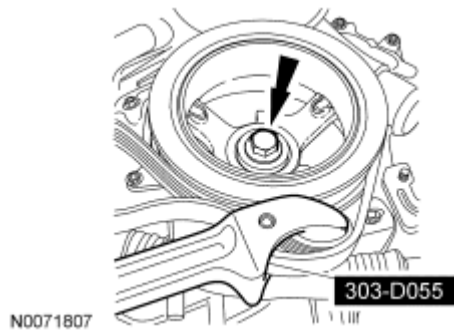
Removing Crankshaft Pulley Bolt & Washer Using Strap Wrench
